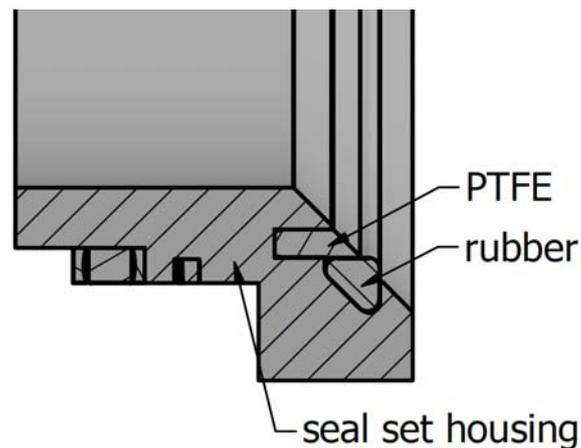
A part of cross-section of the PTFE and rubber ring installed in the housing.
